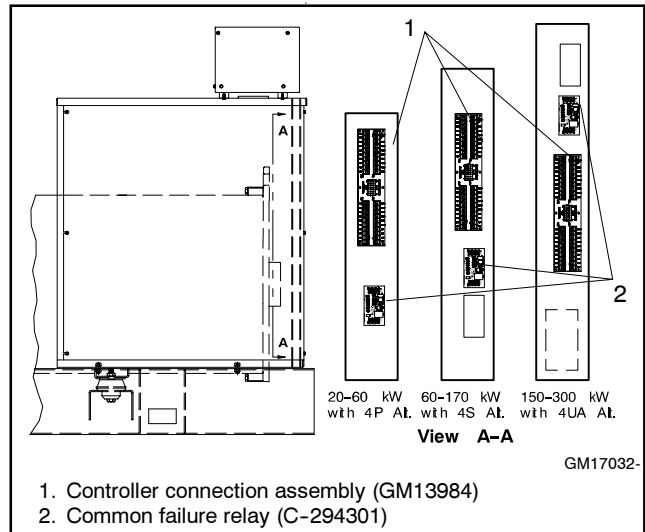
Controller Connection Assembly Mounting Locations in Junction Box (20-300 kW)
